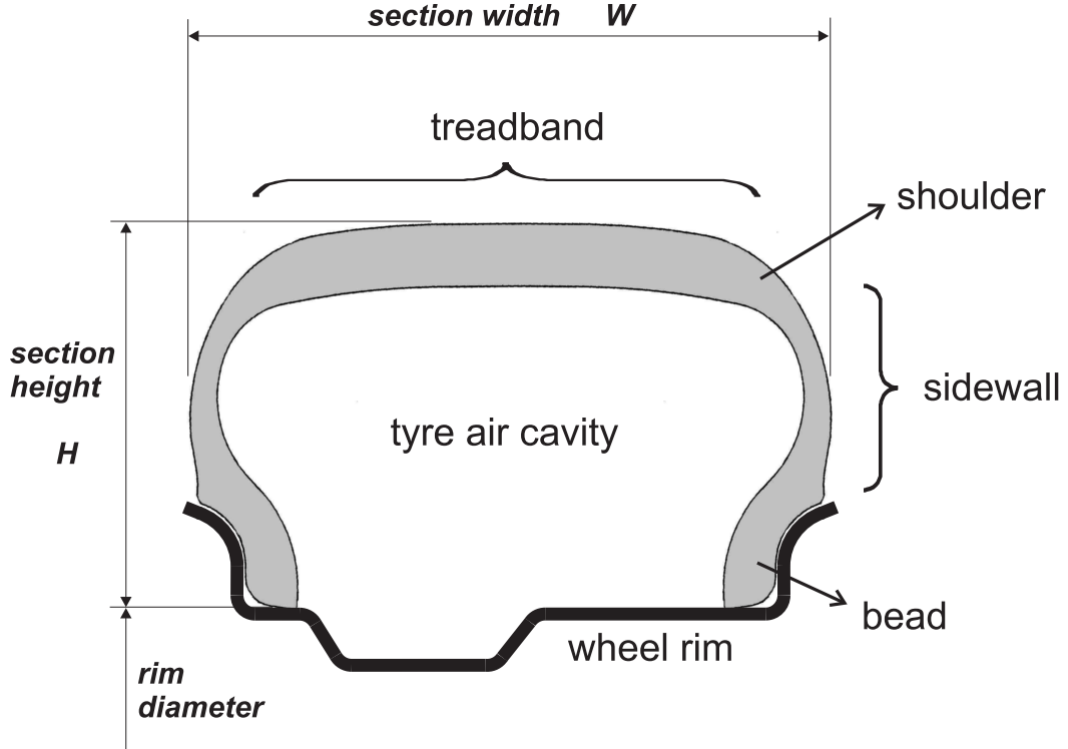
Cross-section of a tyre-wheel assembly. [10]
